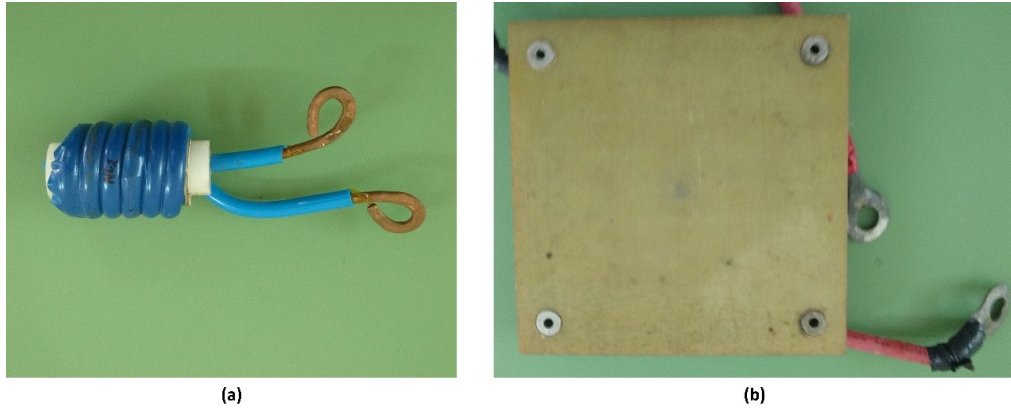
Electromagnetic forming coil (a) 6 turns helical coil (b) 7 turns Spiral coil enclosed inside epoxy casing
